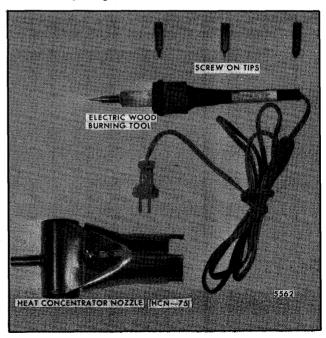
Wood Burning and Heat Concentrator Tool
